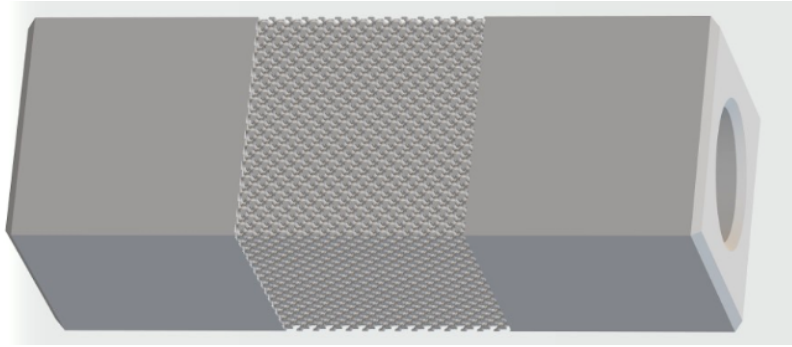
Original geometry model for the 3D-printed specimens (trabecular Diamond 14 structure, uniaxial tensile tests). The model was later modified due to printing defects.
